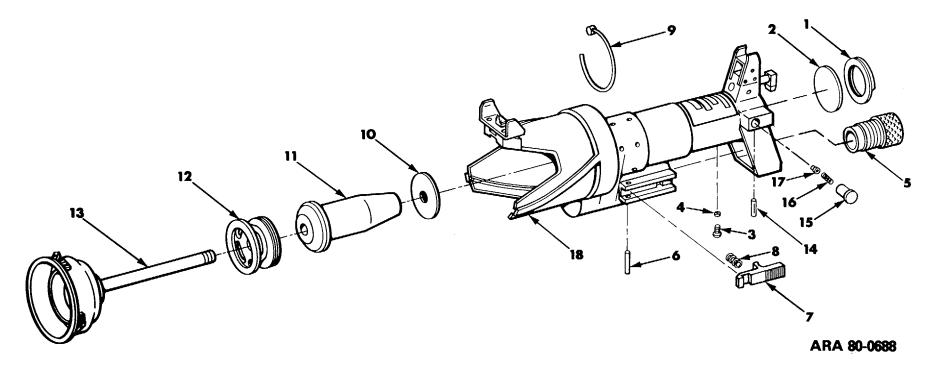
Launcher, projectile, 64 millimeter: riot control, M234.
